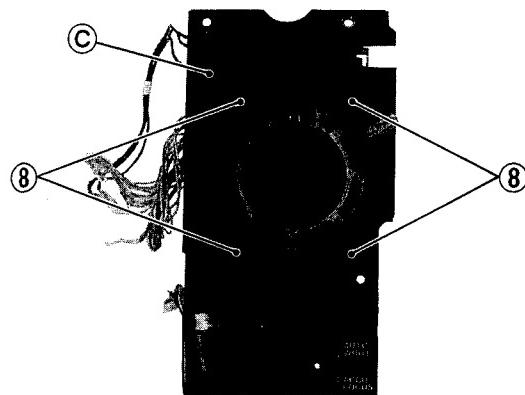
Removing the Optical Filter Assembly
